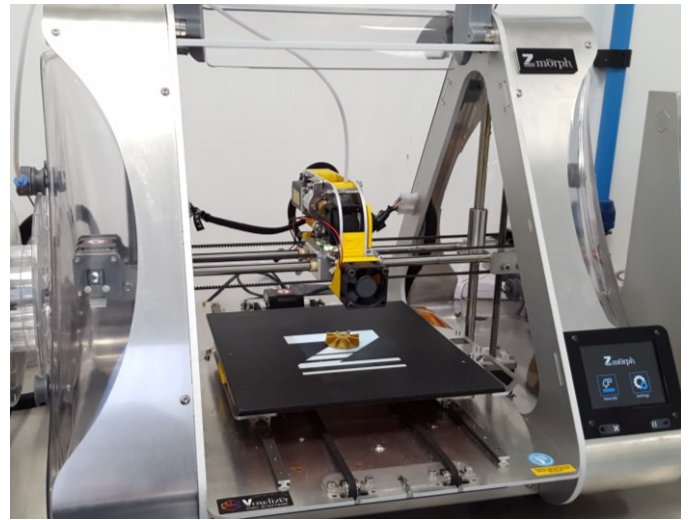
Zmorph CNC equipment used for 3D printing of the turbine blades.
